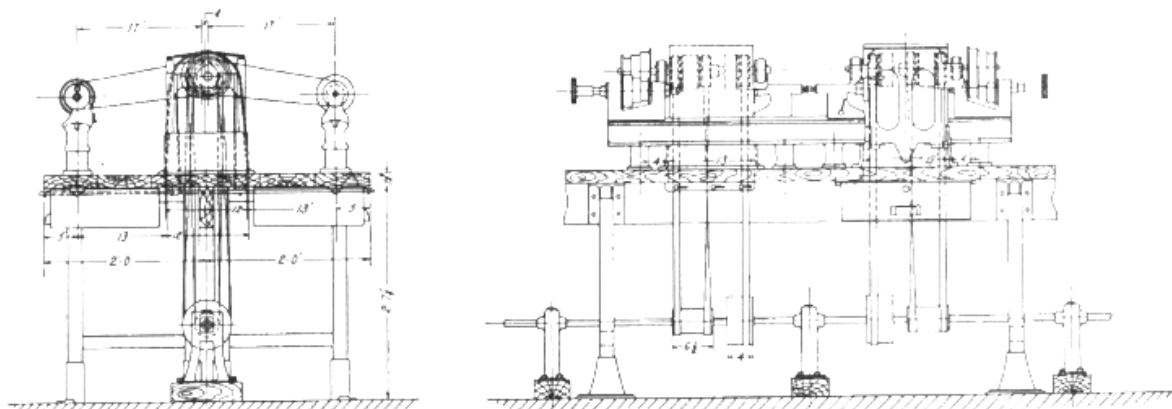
Dimension diagram of Horizontal Safety Drive Countershaft, group drive, lineshaft under bench
